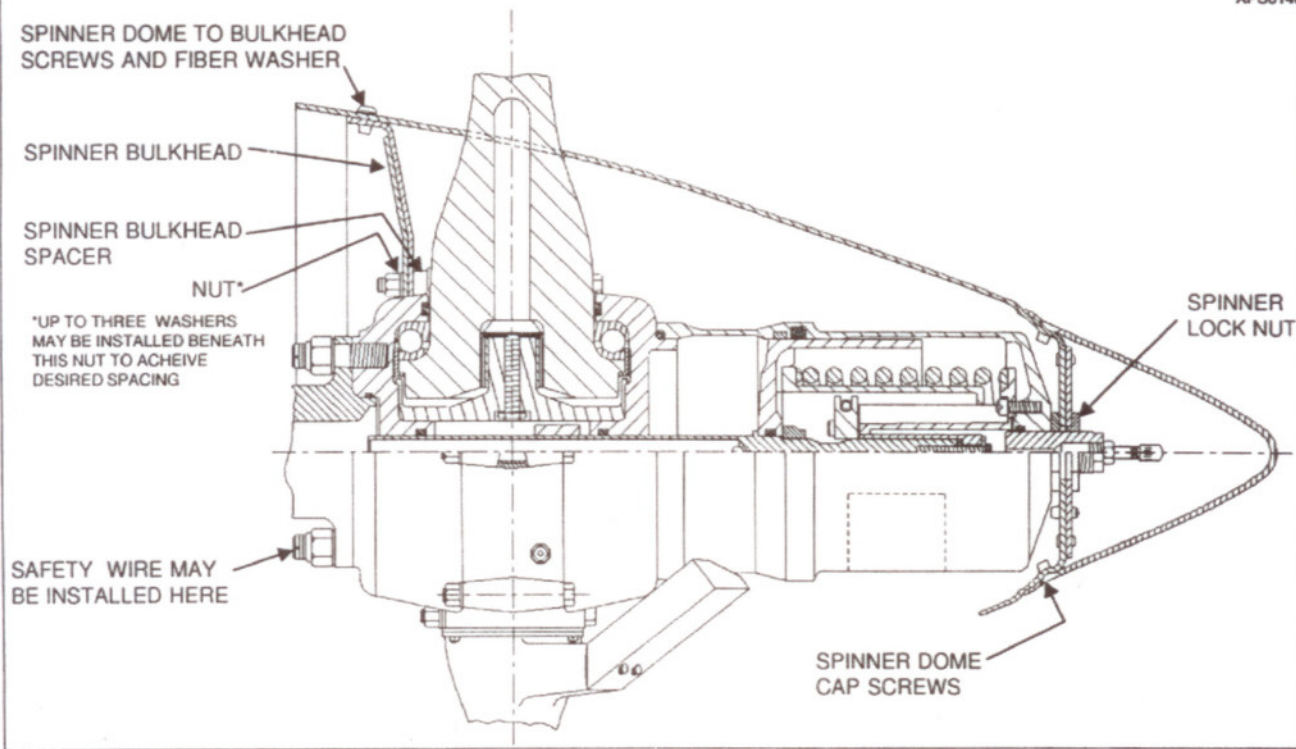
Spinner Bulkhead and Spinner Mounting (Hub Mounted Spinner)
